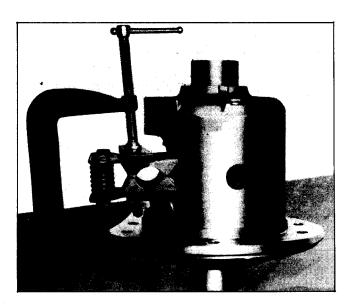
D-5 Install 1/4" Bolts, Bar Stock and C-Clamp
